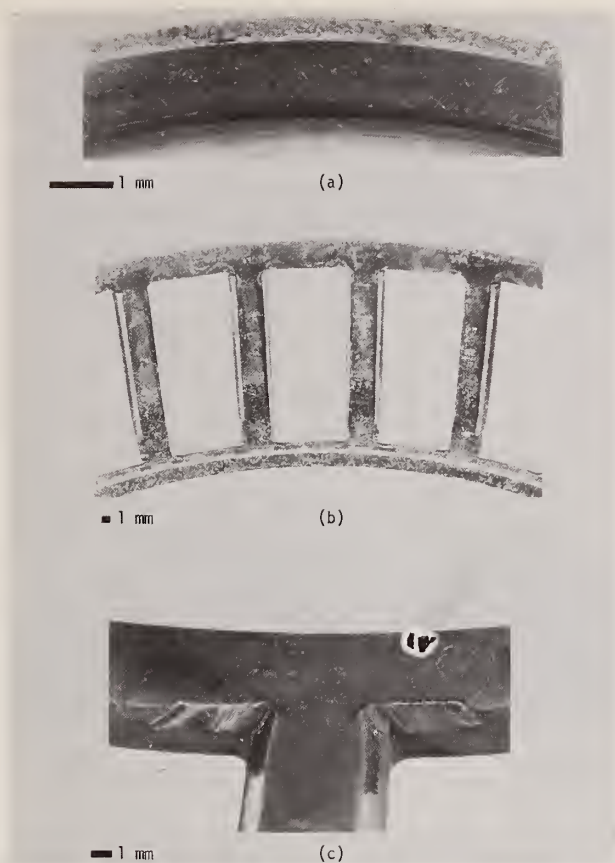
Scuffing (a mild form of adhesive wear) damage on a cone L. E. rib or thrust rib in (a). In (b) and (c) the cage or retainer shows abrasive type wear where the hard surface of the rollers cut the softer cage material.
